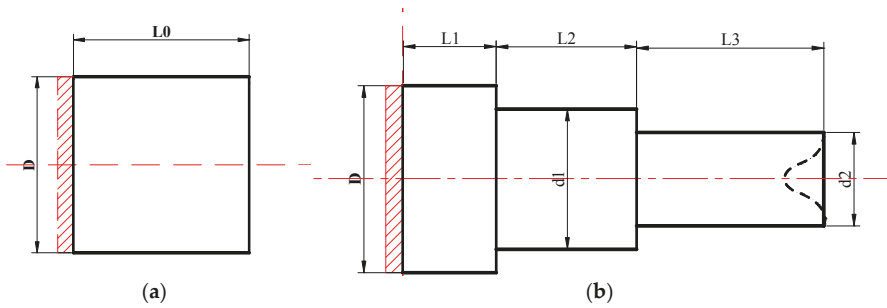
Diagrams of traditional billets and product: (a) traditional billet; (b) rolled piece.
